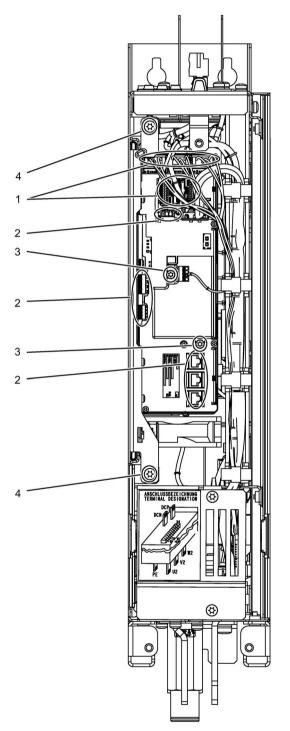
Replacing the electronic fan, Motor Module, frame size FXL
